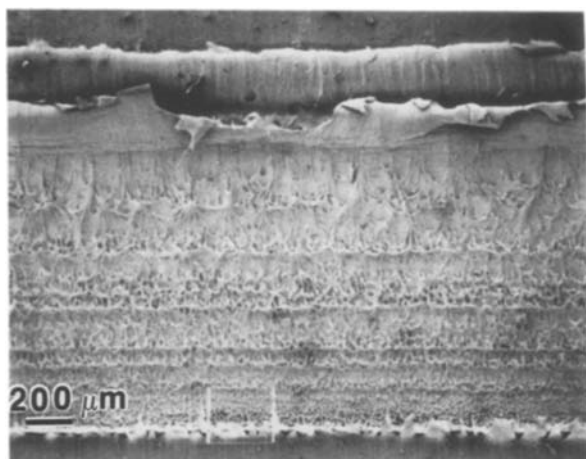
Fracture surface of specimen after 60h on test after fracture in liquid nitrogen.
